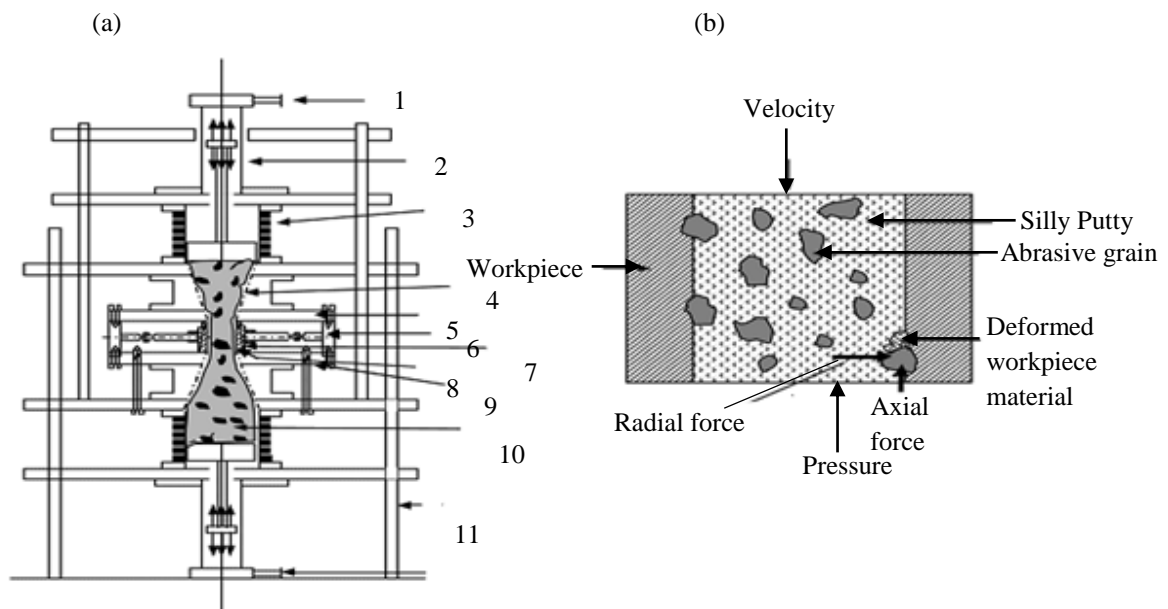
(a) Illustrative drawing of experimental setup: 1-Hydraulic oil inlet, 2-Hydraulic cylinder, 3-Medium cylinder, 4-Smooth entry profile, 5-Top cover plate, 6-Dynamometer, 7-Central hub, 8-Split cylindrical fixture with workpiece, 9-Bottom cover plate, 10-Support frame, 11-Hydraulic oil outlet, 12-Medium with abrasive particles and (b) Forces acting on grain [8]
